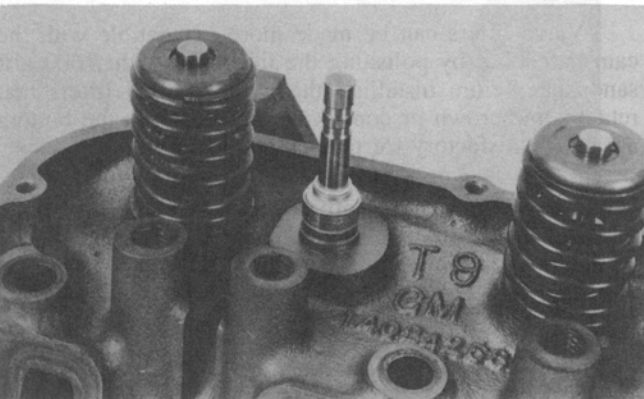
Aftermarket valve stem oil seals should be used with dual-coil valve springs.
